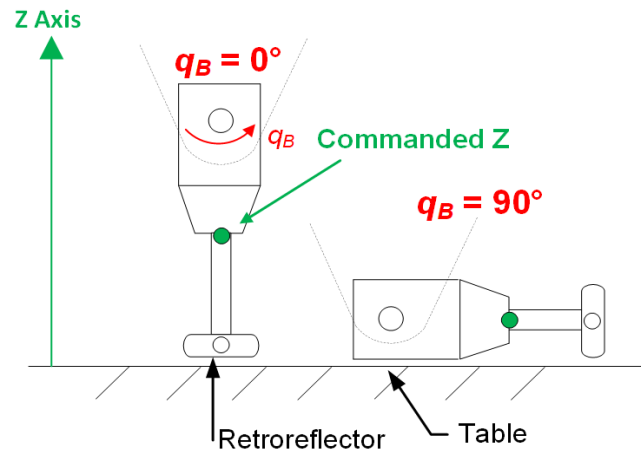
Illustration of coupling between B and Z Axes for a five axis machine tool.
